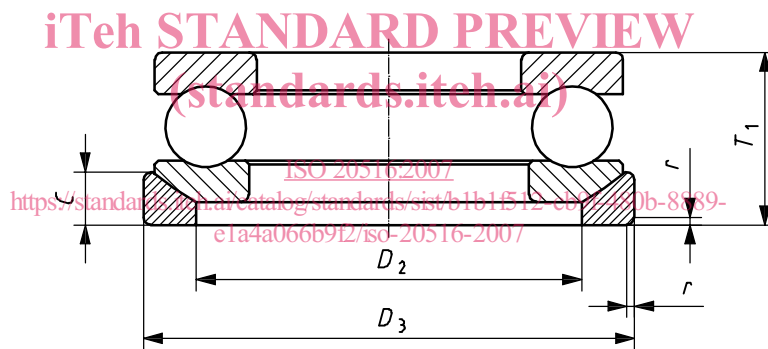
Single-direction aligning thrust ball bearing with aligning seat washer
